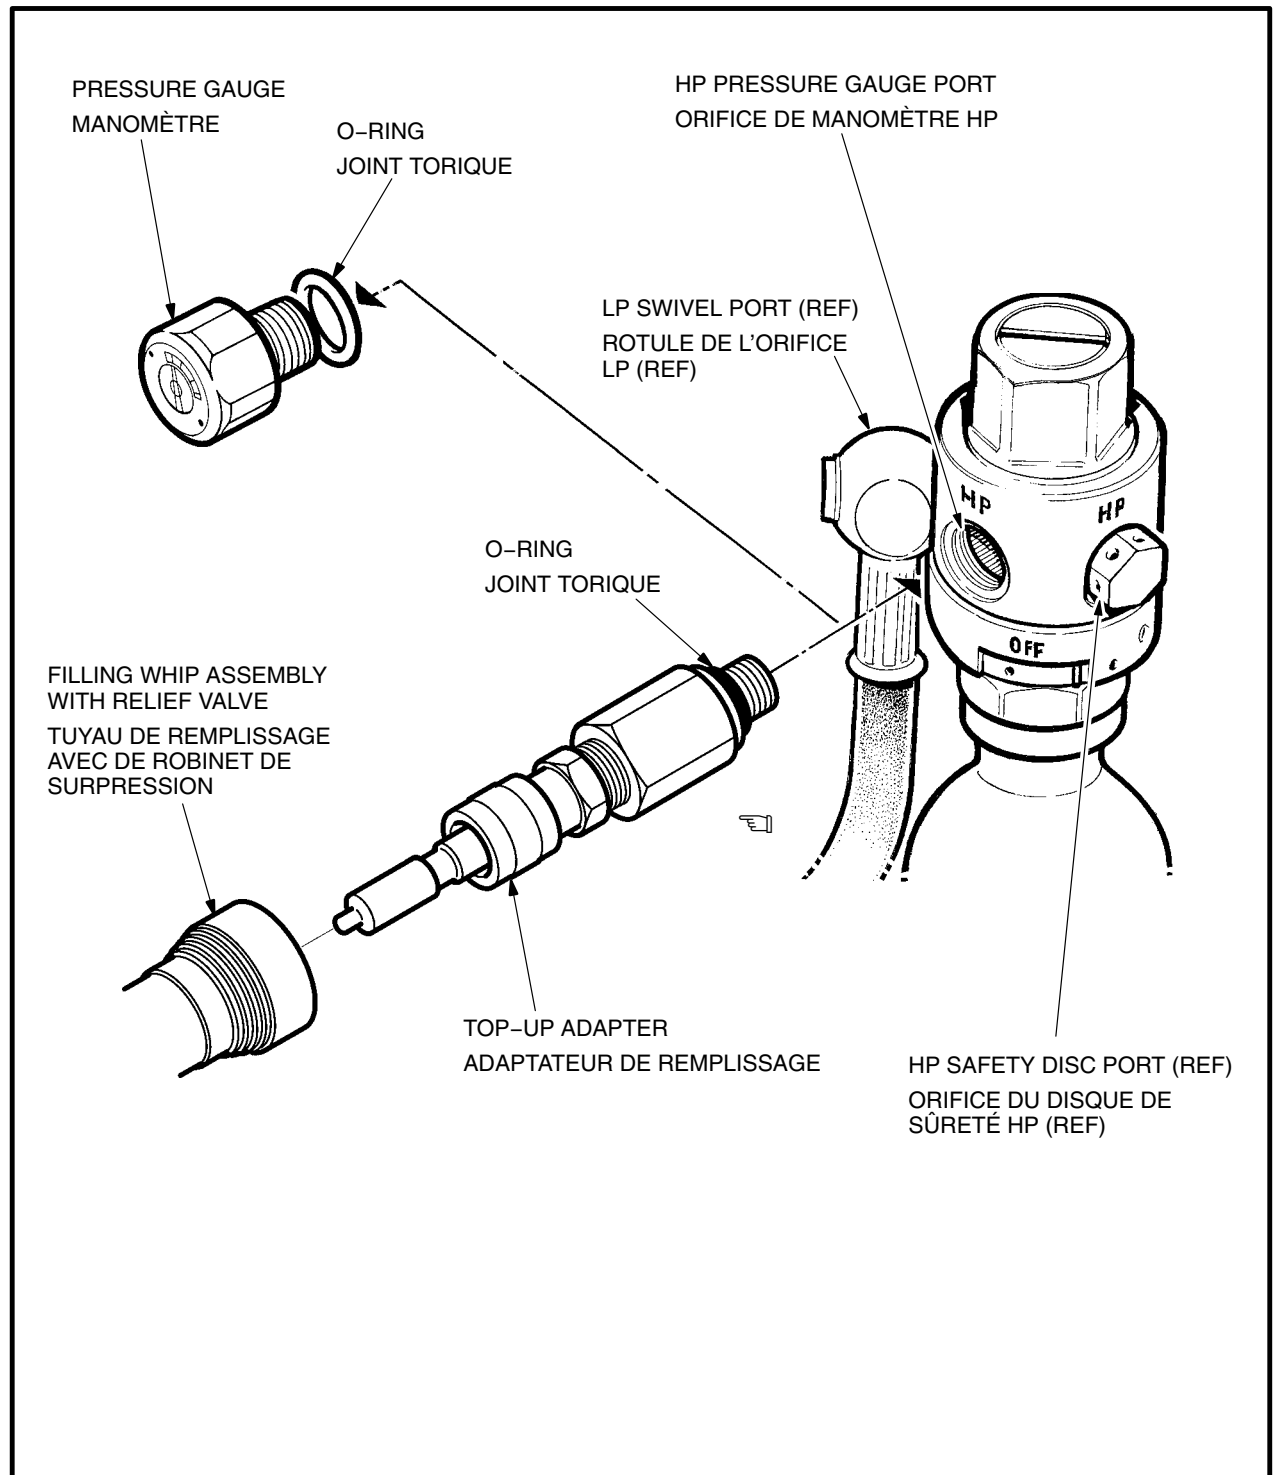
Pressure Gauge Removal and Top-up Adapter Installation
